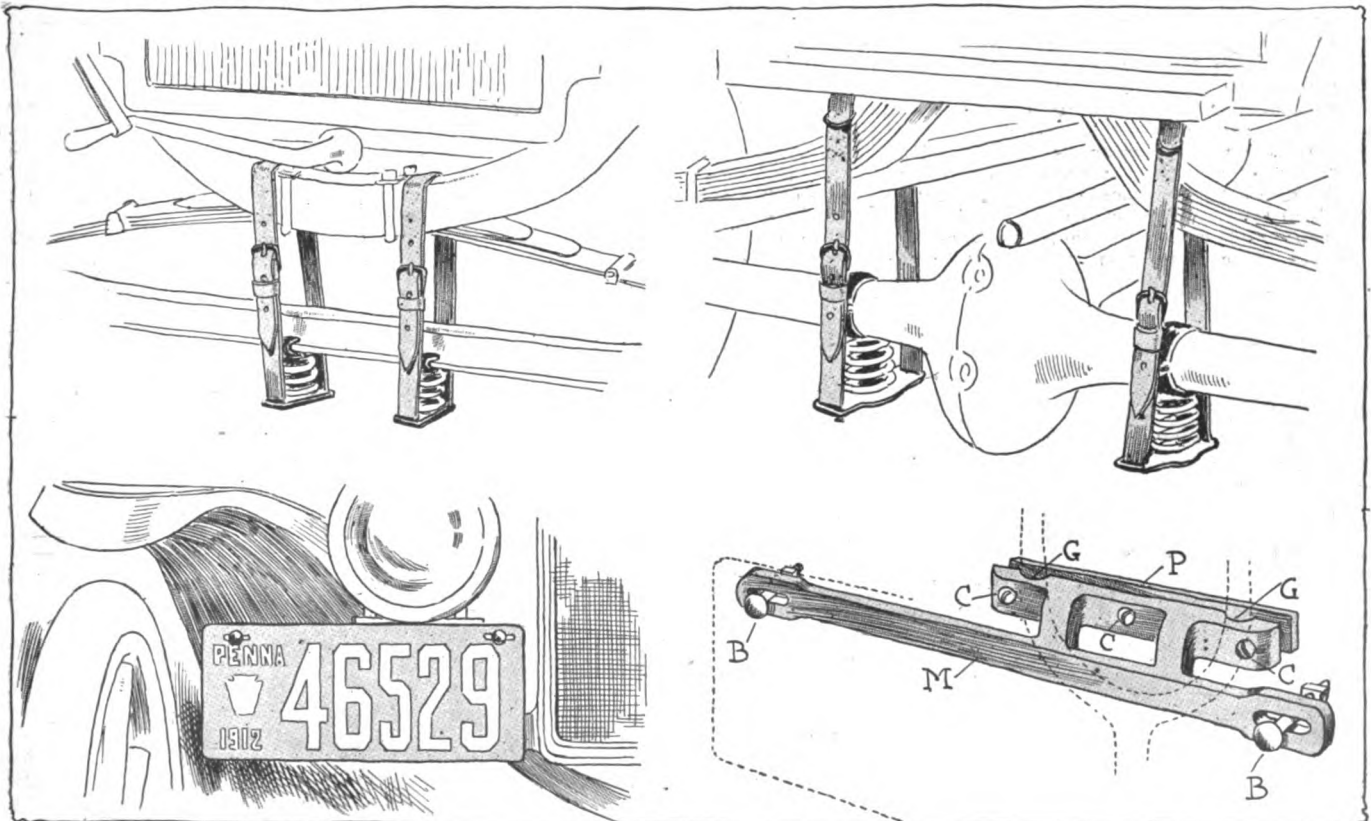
Mitchell rebound check and shock-absorber applied to Ford model T front axle. Fig. 5—Mitchell shock-absorber design for rear axle unit. Fig. 6—Killingsmith front license-tag holder for Ford model T cars. Fig. 7—Constructional view of Killingsmith license-tag holder
